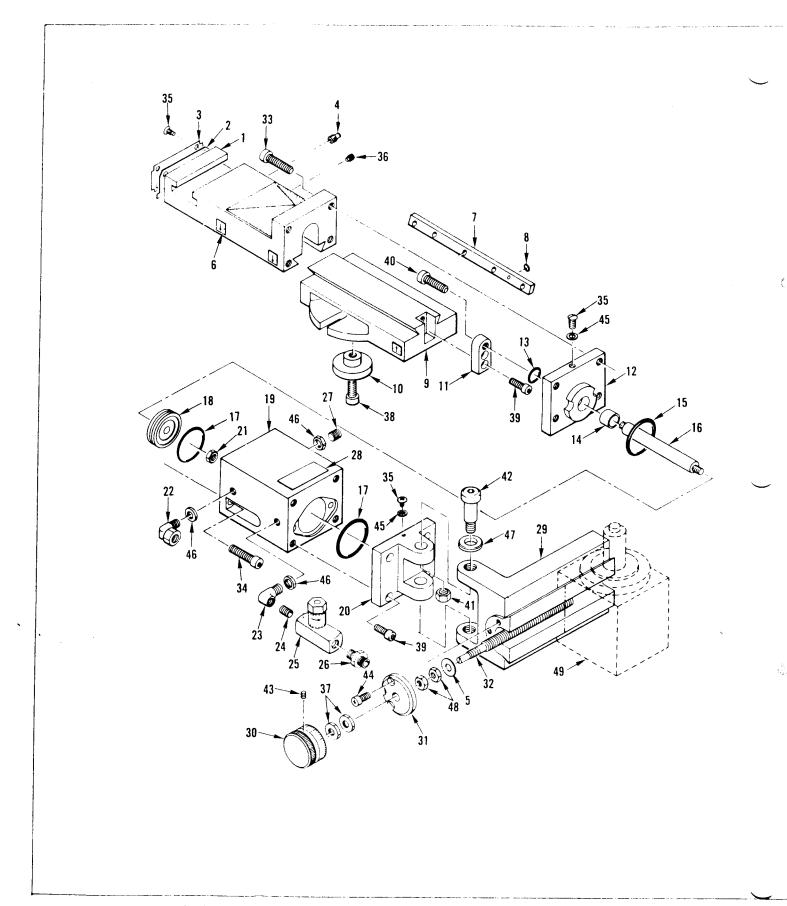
Exploded View of Mark "O-A" Series Lathe Tracer Attachment and
